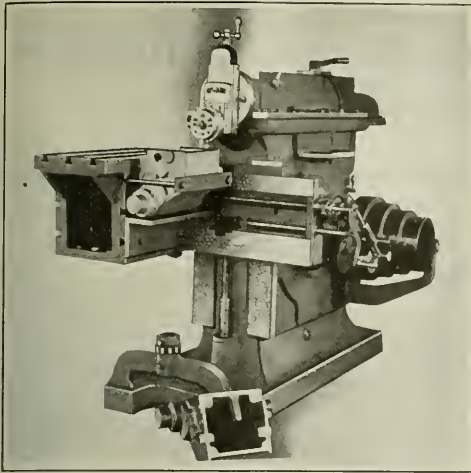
Shaper equipped for machining a Lathe Feed-box
